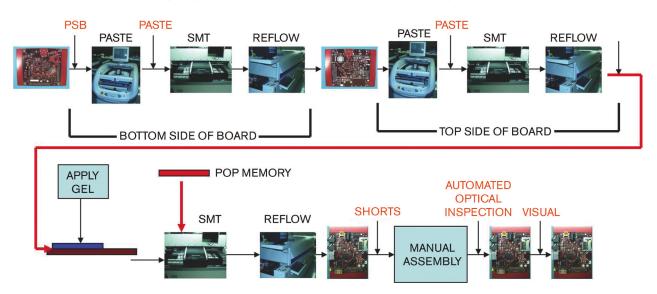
A board-assembly flow begins with a PCB and ends with a visual inspection of the work.
